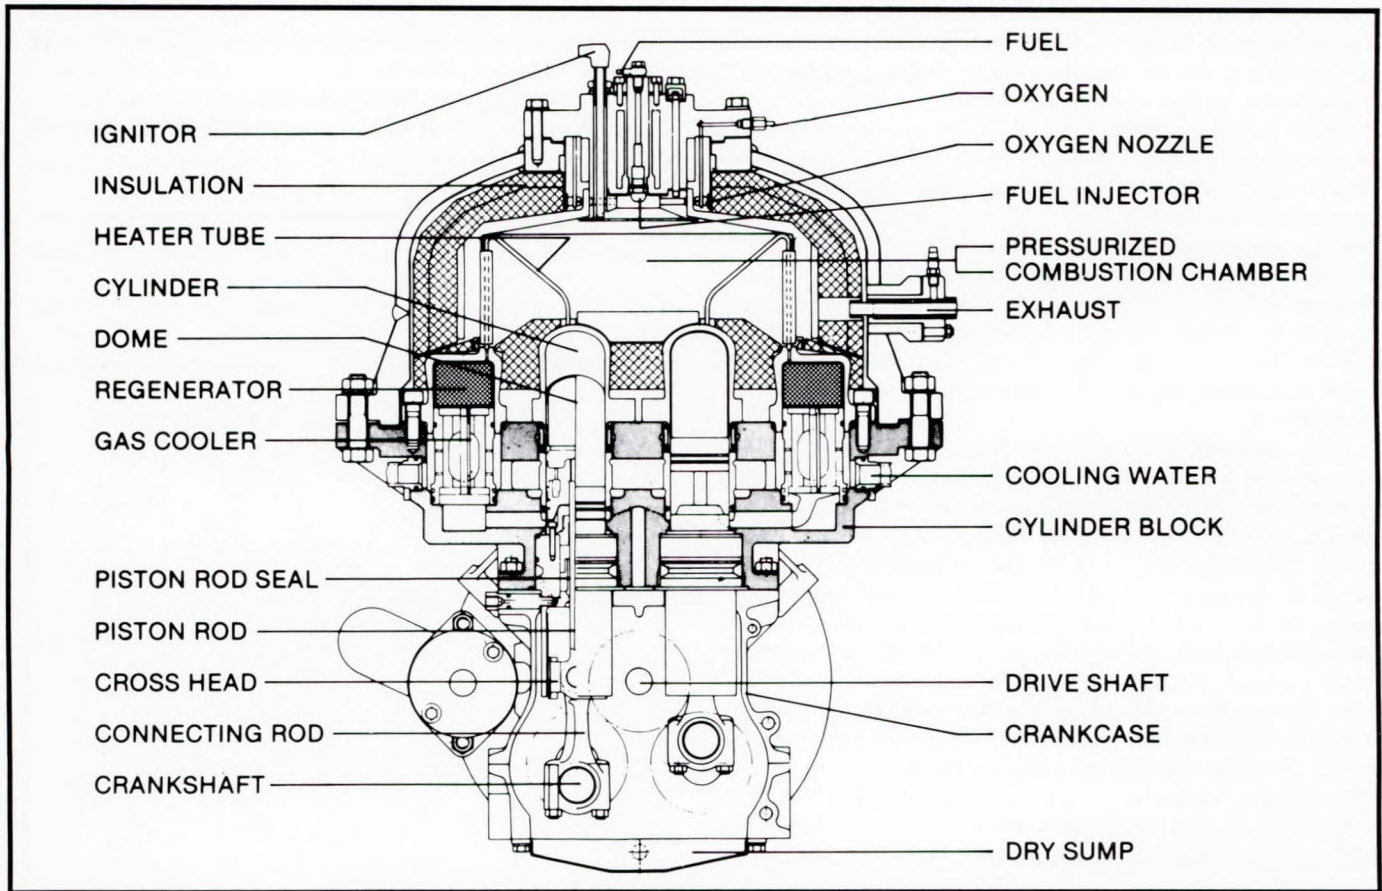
Cross-section of the first underwater 4-95 Stirling engine
